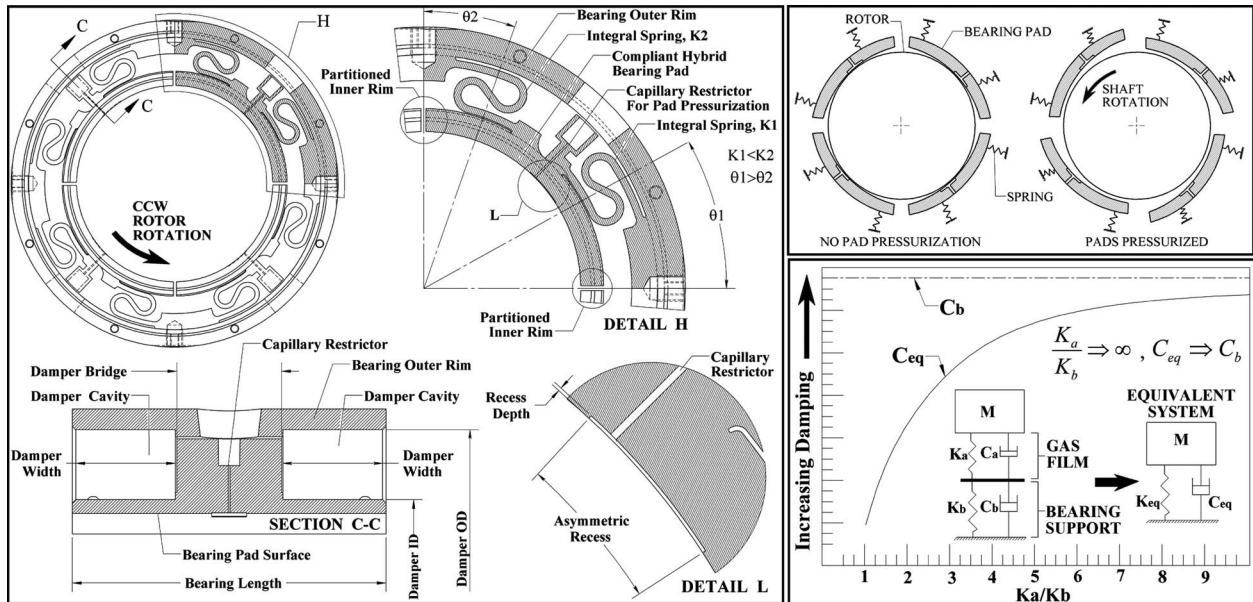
Generation II style single piece bearing housing design and concept of operation
